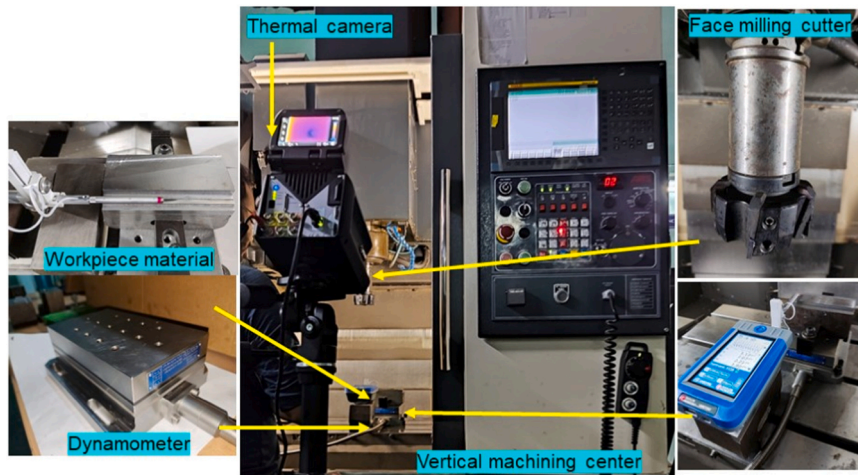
Experimental setup for carrying out machining tests using uncoated and coated milling inserts.
